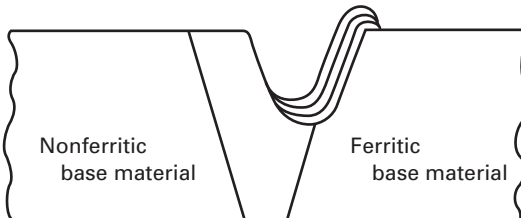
AUTOMATIC OR MACHINE (GTAW) TEMPER BEAD WELDING OF DISSIMILAR METAL WELDS OR BUTTERING
